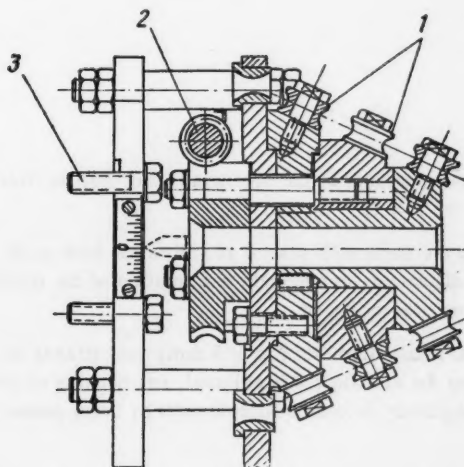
Attachment for the manufacture of permanently twisted rope: 1) rolls; 2) worm gear; 3) fastening bolts.
